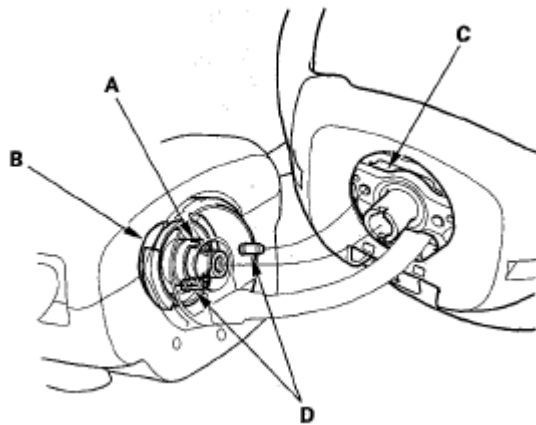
Engaging Pins Of Cable Reel And Tabs Of Canceling Sleeve
